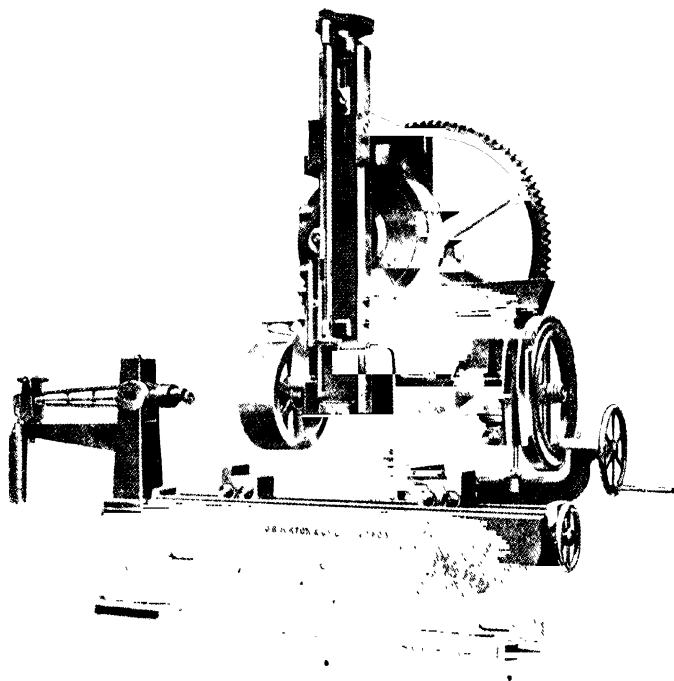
THE BUCKTON VIBRATORY SPRING TESTING MACHINE.
